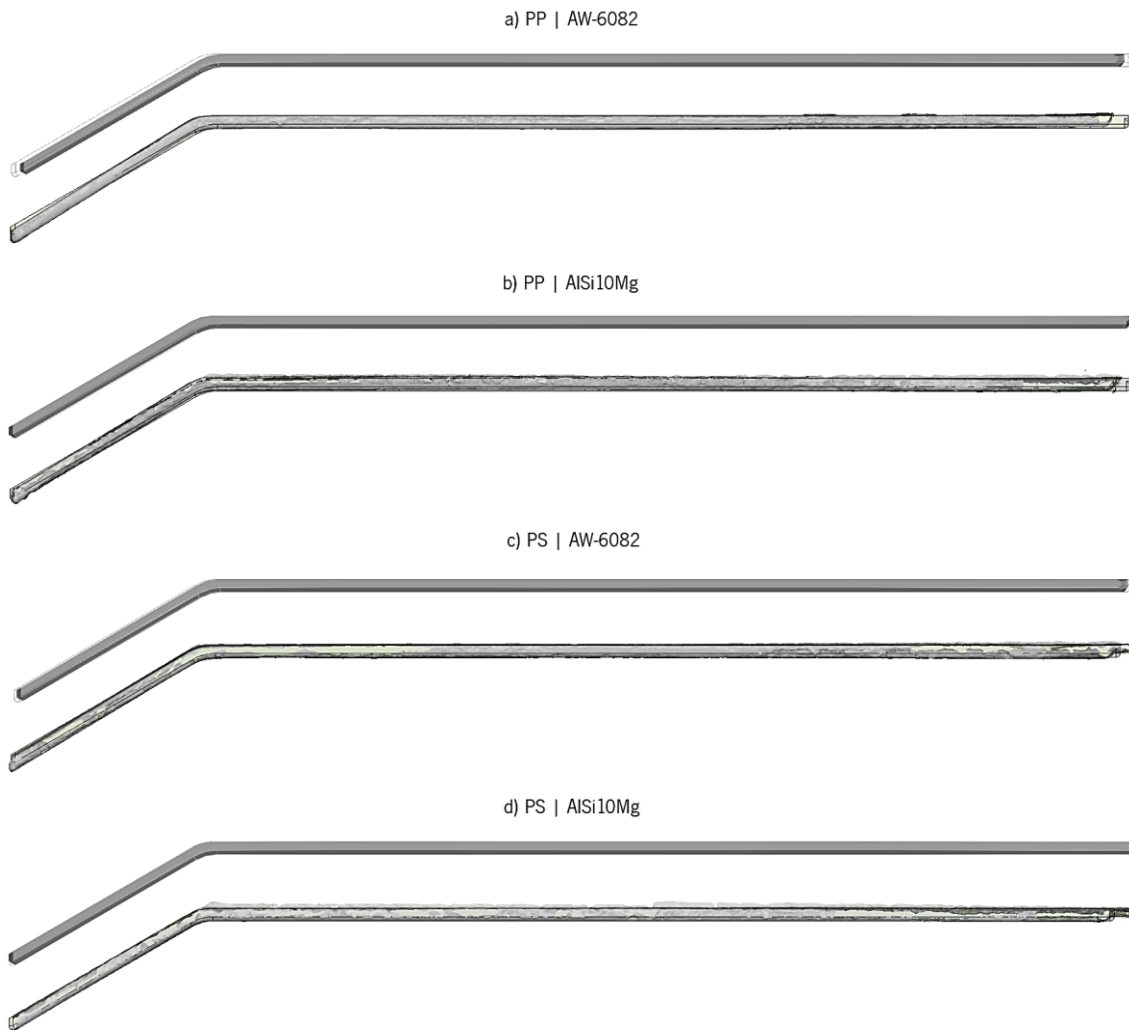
Warpage of the mouldings (predicted – top; actual – bottom).
